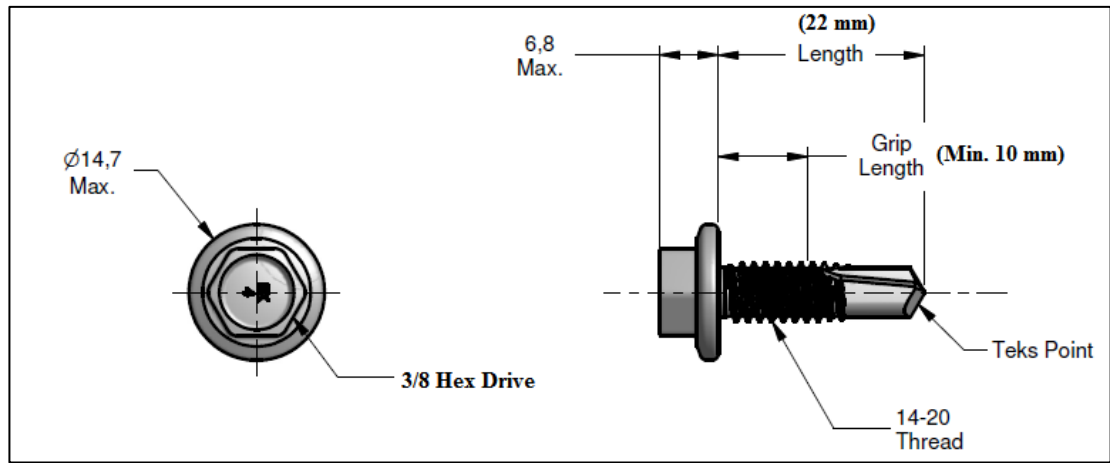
Schematic drawing of self-drilling screws used as shear connectors
